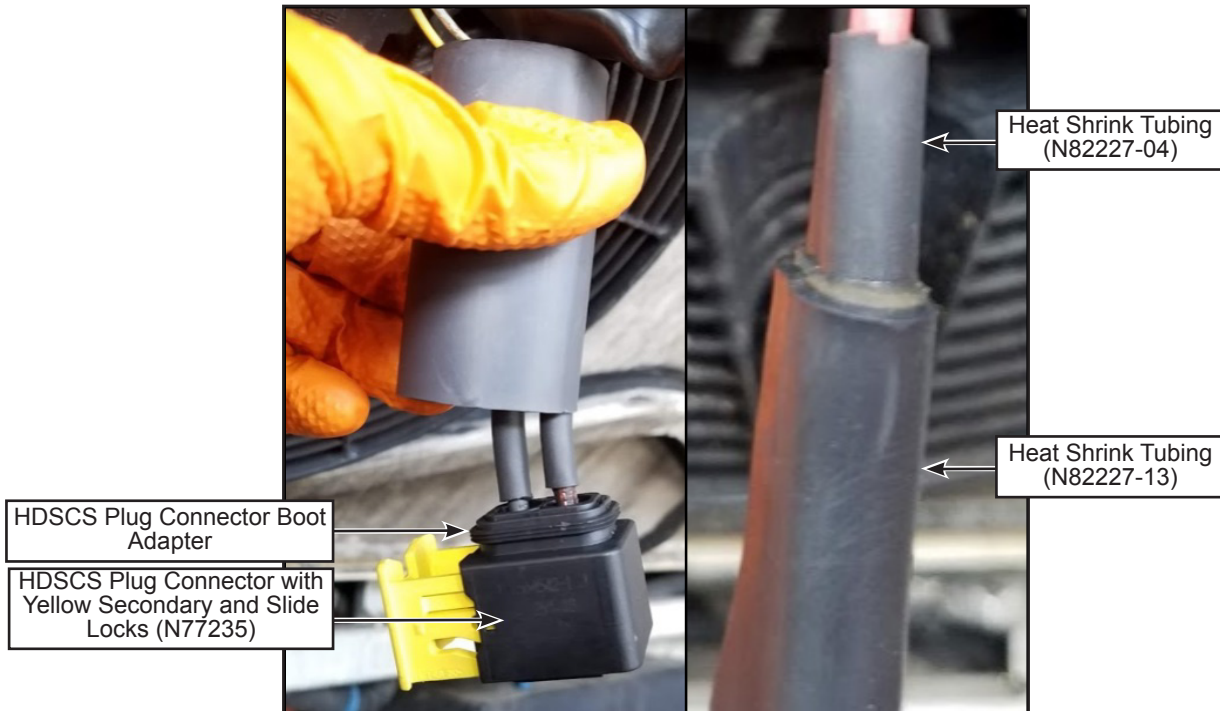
Heat Shrink Tubing Installation on HDSCS Plug Connector Wiring at Fan Side
